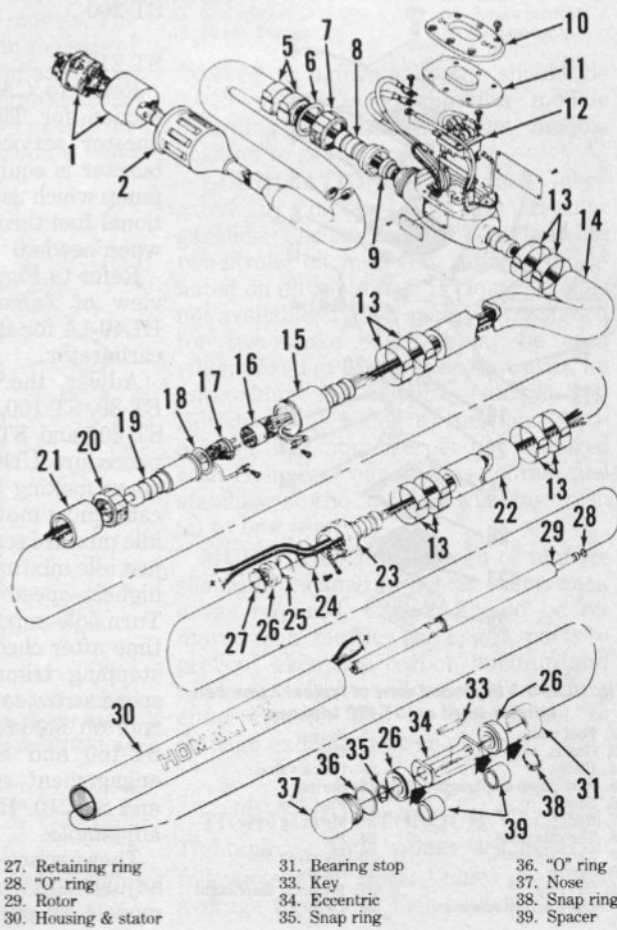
Exploded view of concrete vibrator. Rotor (29) and eccentric (34) are a one-piece assembly on Model VCH-250. Snap ring (38) and spacers (39) are only used on Model VCH-250.
